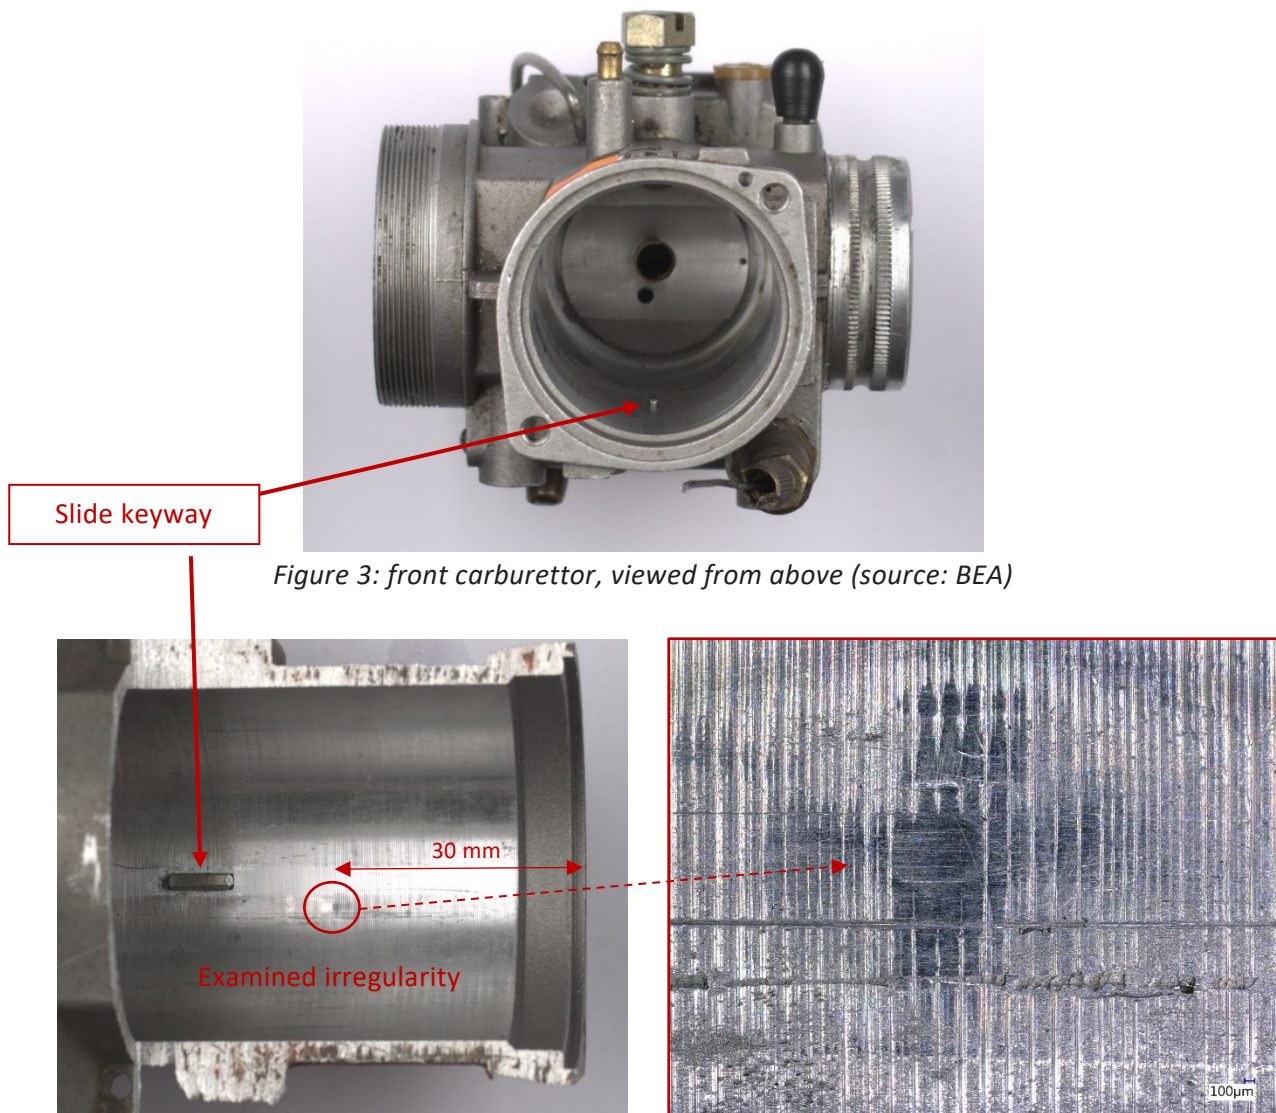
surface irregularity in body of front carburettor, observed after cutting open body on longitudinal axis (source: BEA)
